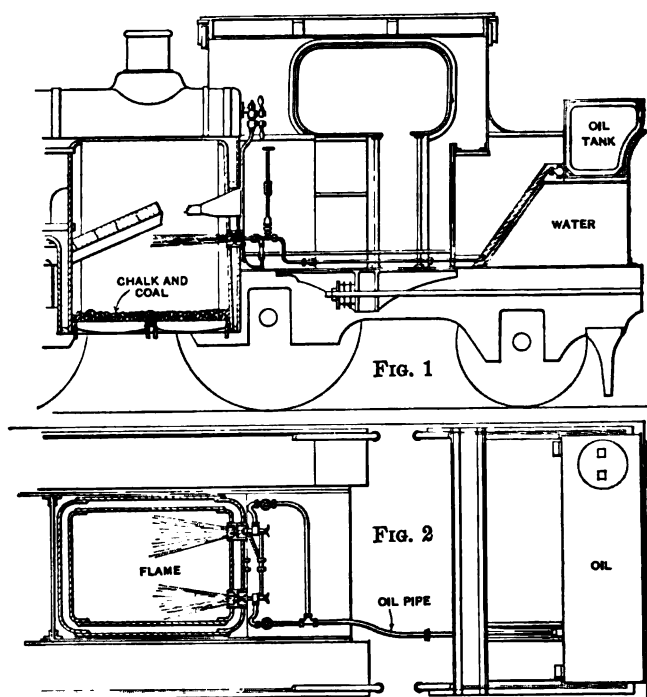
HOLDEN OIL-BURNING LOCOMOTIVE.
